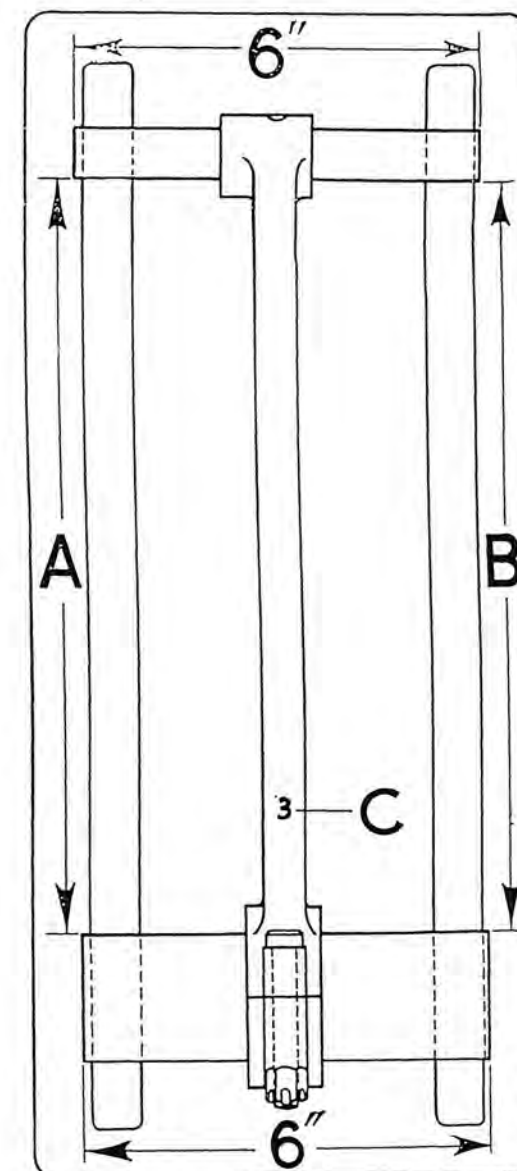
Method Employed in Testing Alignment of Straight Connecting Rods.
